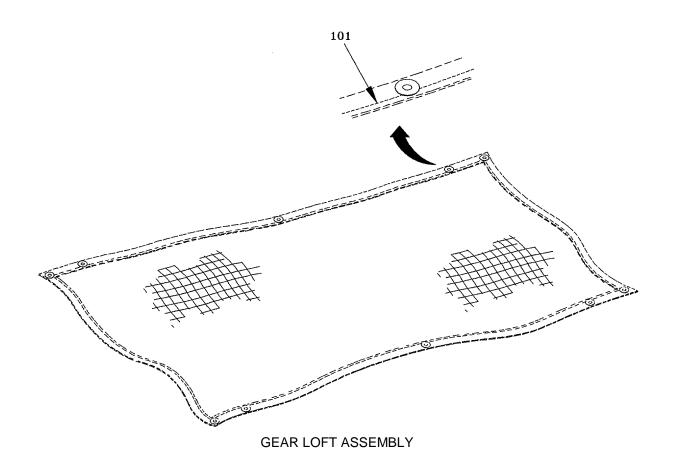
TENT BODY ASSEMBLY (Sheet 10 of 10)
